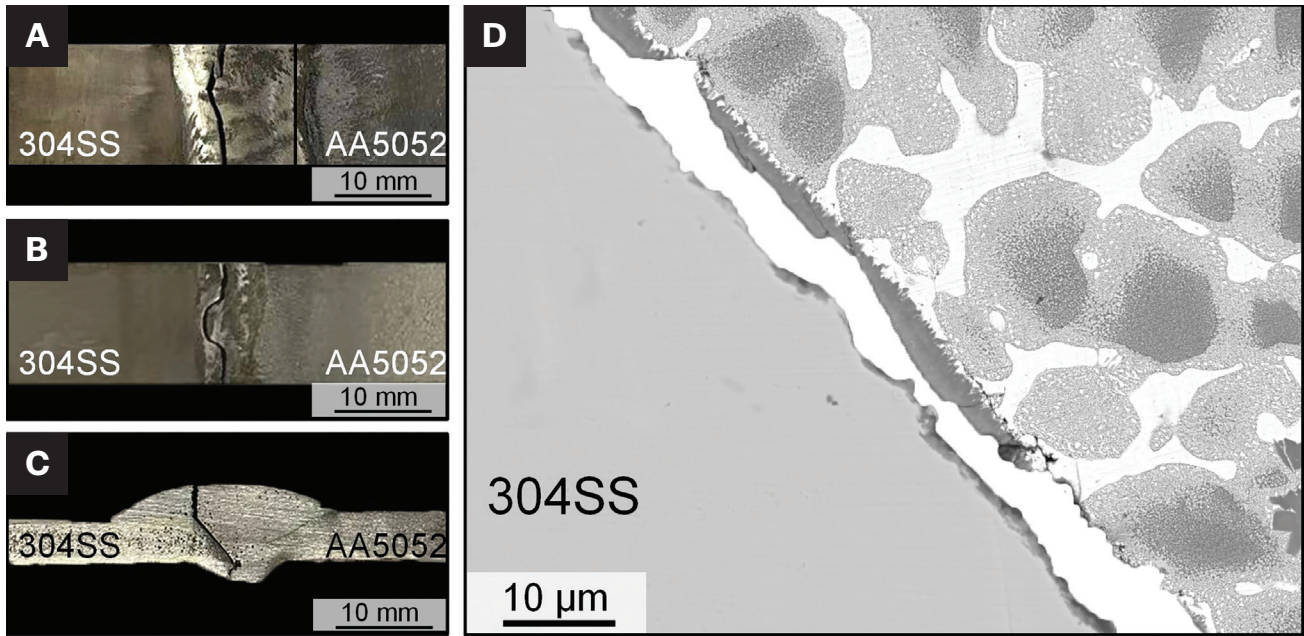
Fracture paths of the flared groove joint: A – Front surface of tensile sample; B – rear surface of tensile sample; C – cross-section of tensile sample; D – the weld seam/stainless steel interface.
